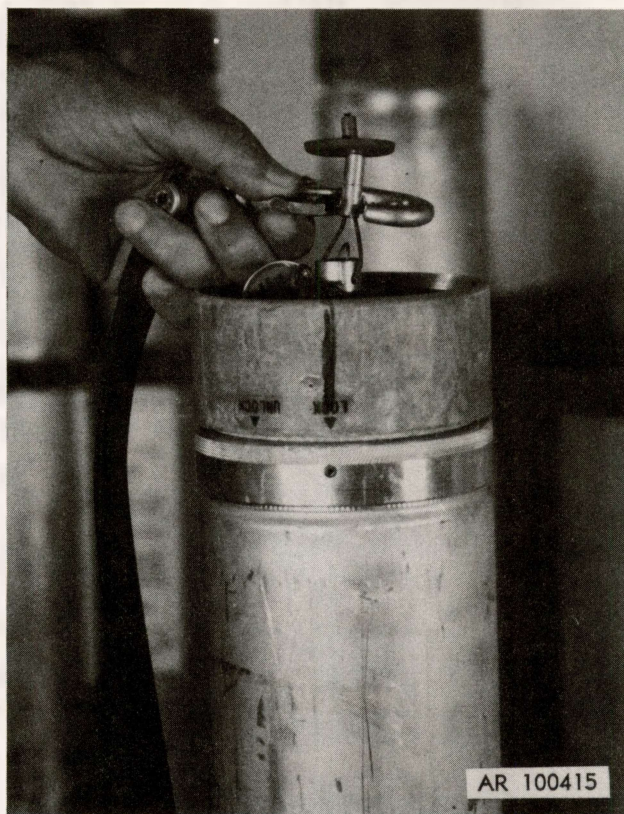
Attaching static line XM164 to pull cable assembly.
